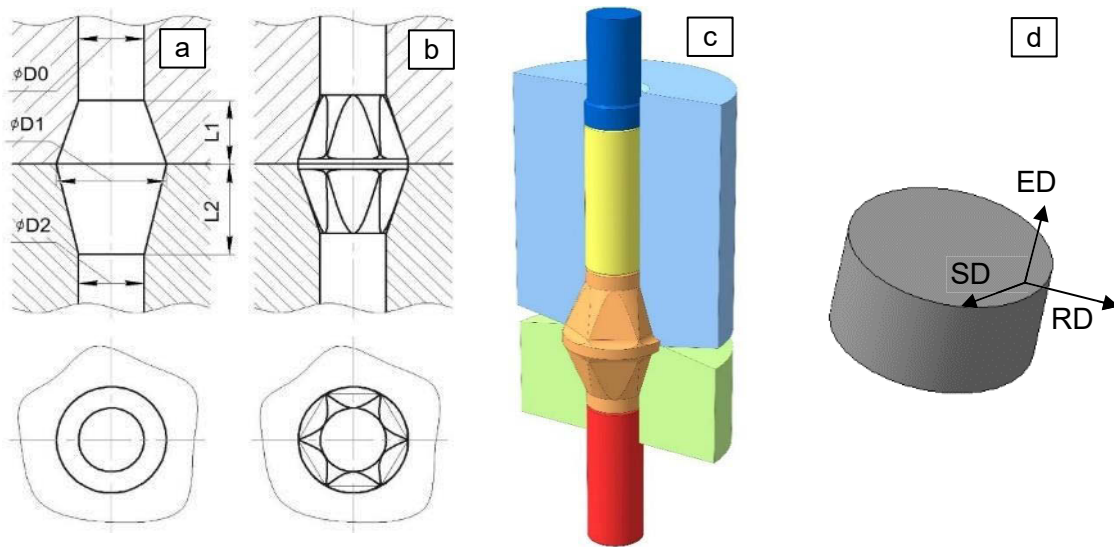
Detailed drawing of the HPTE tool with smooth cone surfaces (a), 6-wrench-shape surfaces (b) and 3D image of a billet inside HPTE die (c) [12]. External directions are shown as radial direction (RD), extrusion direction (ED) and shear direction (SD) (d).
